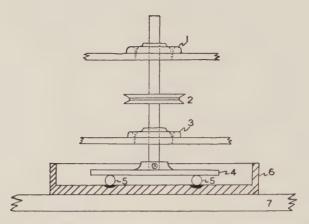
Ball Mill For Cutting Multiple Spheres. 1, upper bearing; 2, traction pulley for V belt; 3, lower bearing; 4, rotating disc; 5, spheres; 6, cast-iron tub with shallow circular groove. To the circular groove is fed the abrasive grit with water as the balls roll around in it; 7, section of table top.
